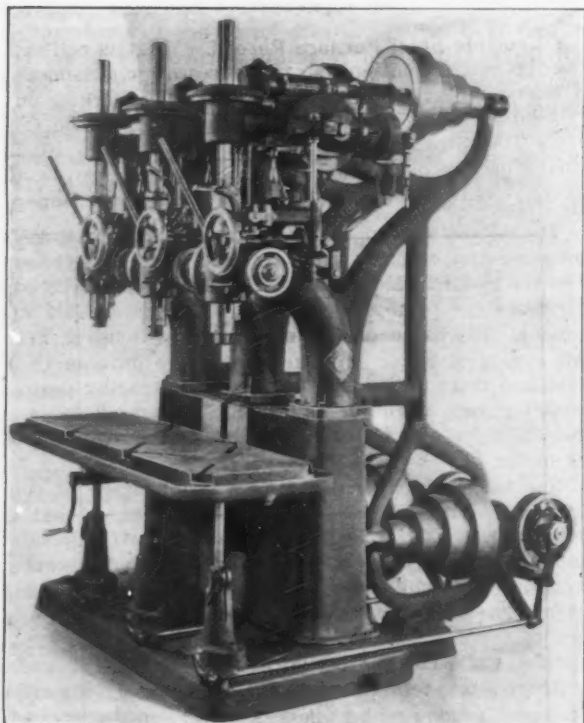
A Heavy Duty 22 1/2-In. Gang Drill with Back Gears, Power Feed and Automatic Stops, Built by the W. F. & John Barnes Company, Rockford, Ill.
